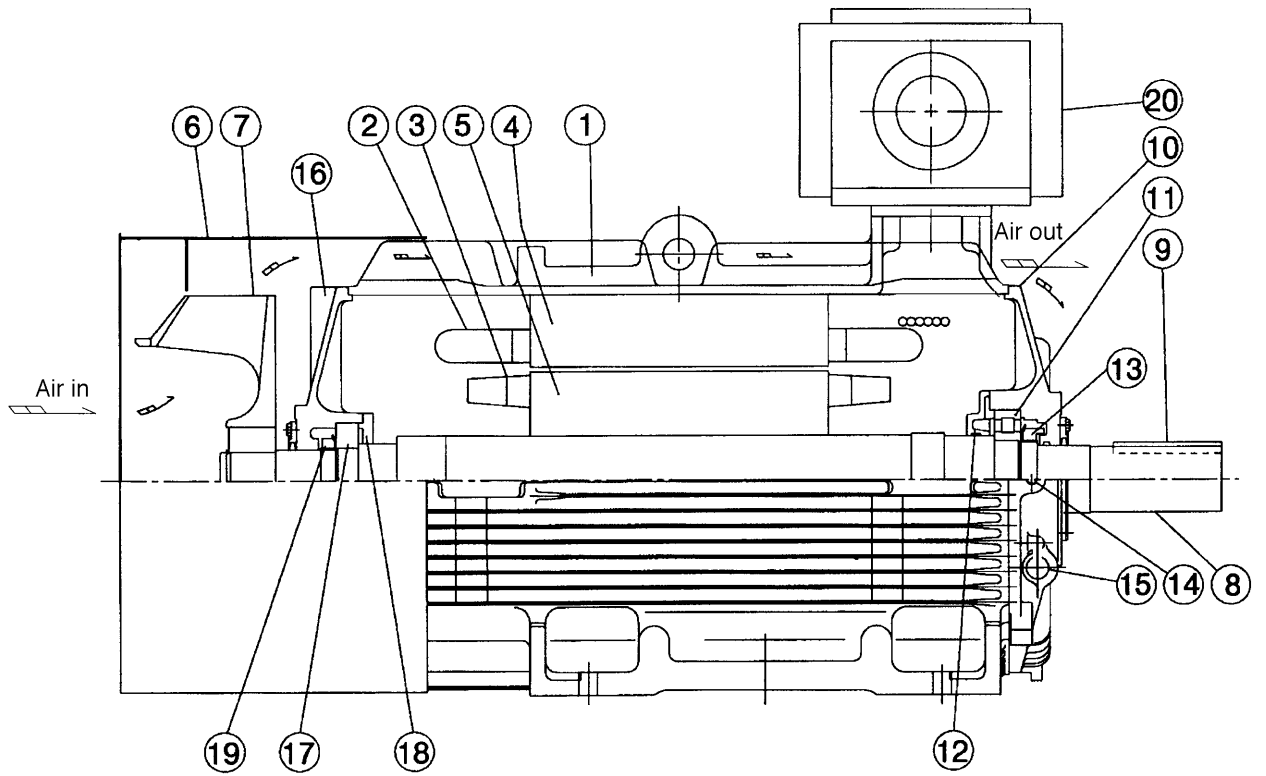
Section Drawing of Horizontal foot mount (Frame size 280L)
